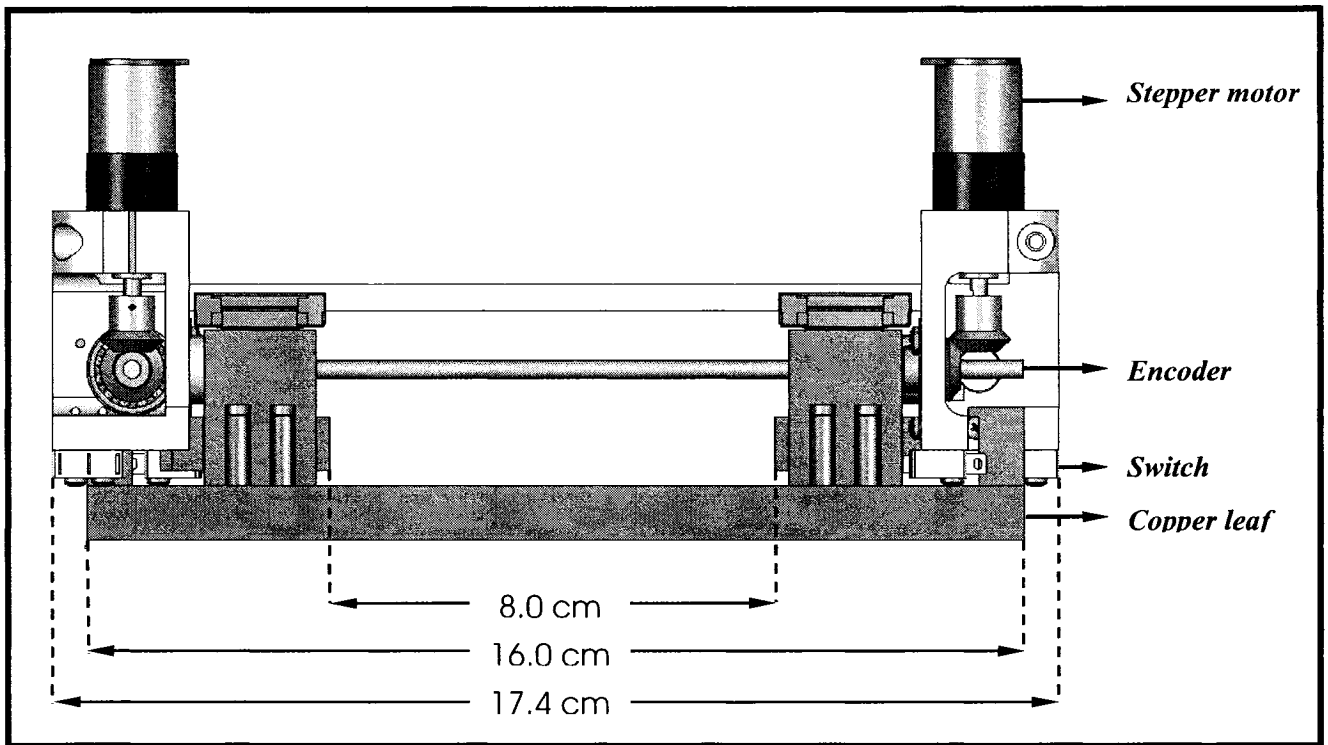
Design drawing showing a side view of the FLEC prototype.
